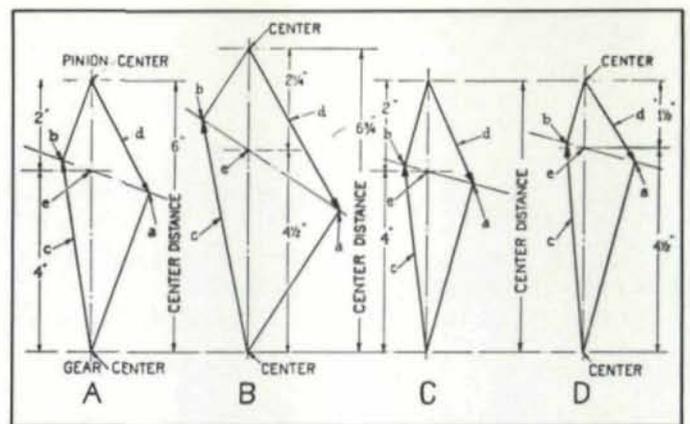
Diagram Illustrating Basic Elements of Involute Gearing.
